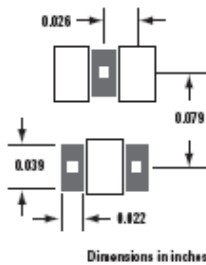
Recommended PCB Pad Layout for Agilent's SC70 3L/SOT-323 Products.
